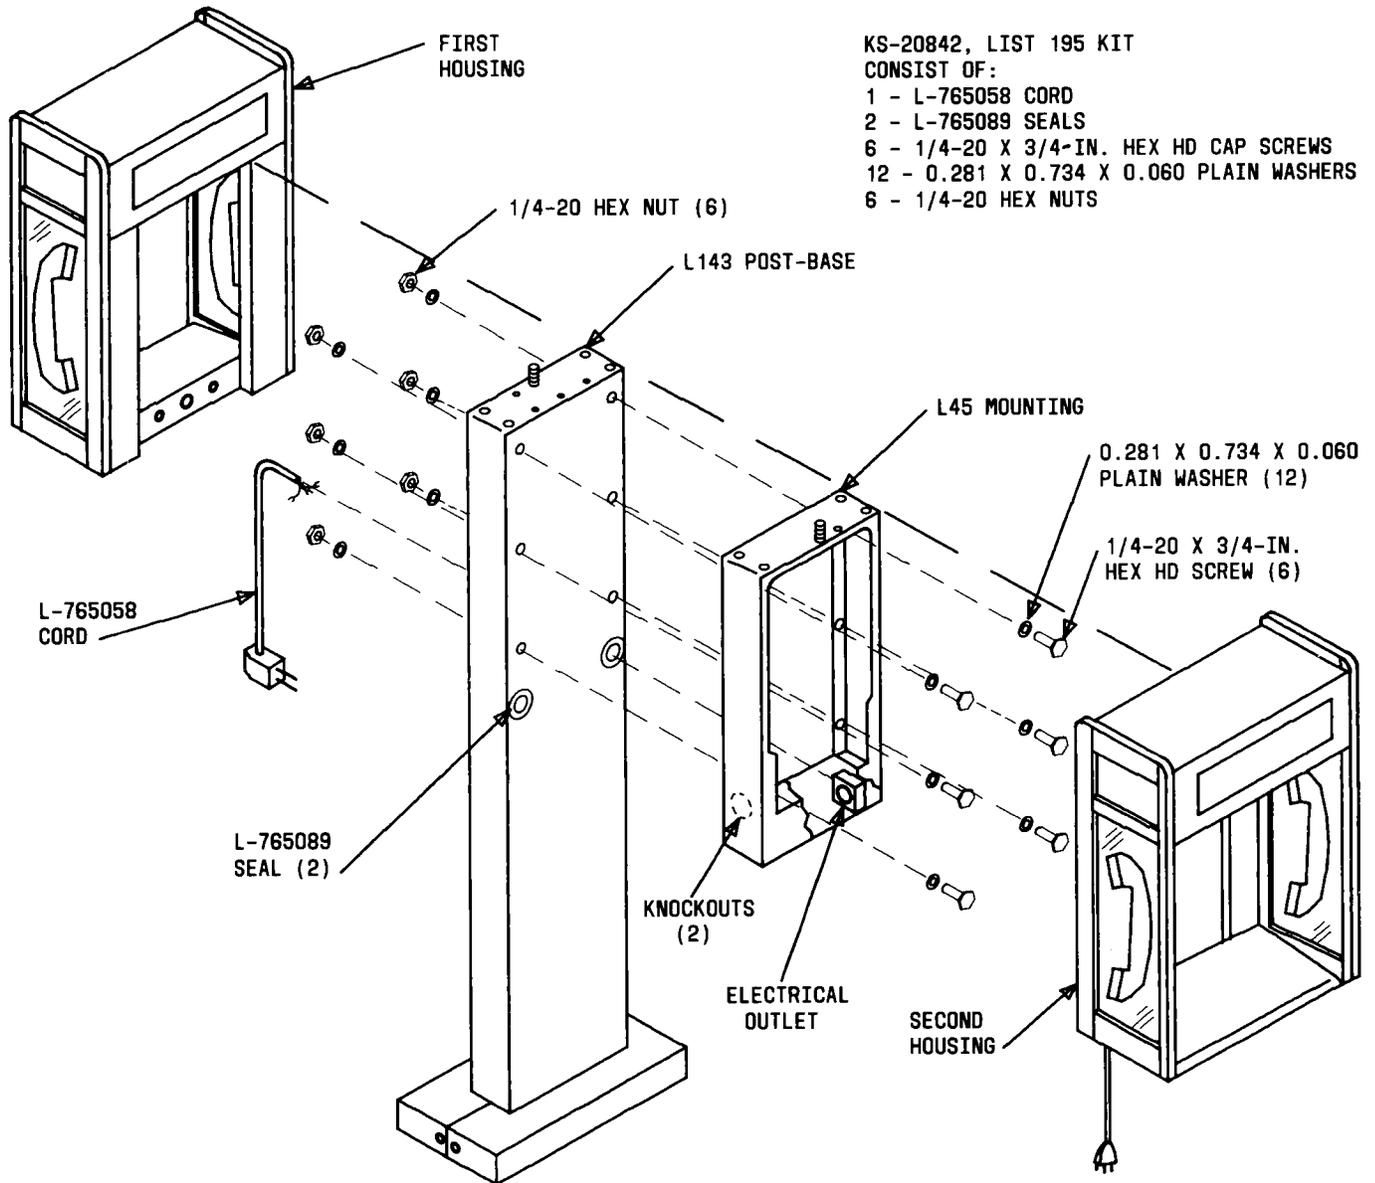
Installation of Two List 33 or 35A Housings Back-to-Back on a List 143 Post-Base Using List 195 Mounting Kit
